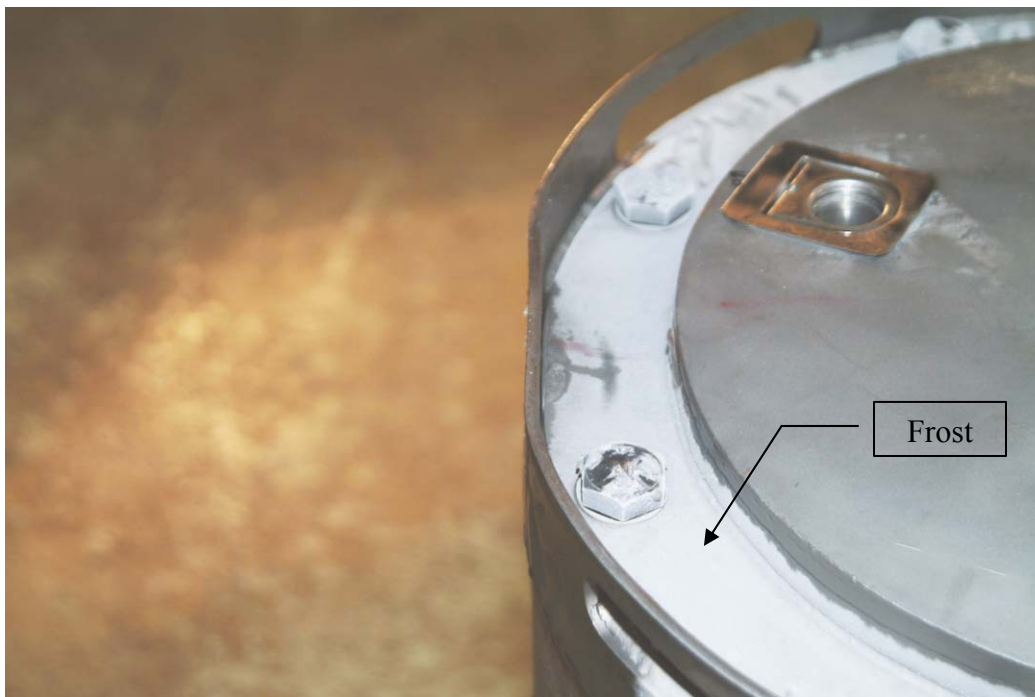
3/16th Inch Thick Drum Flange Flattened
